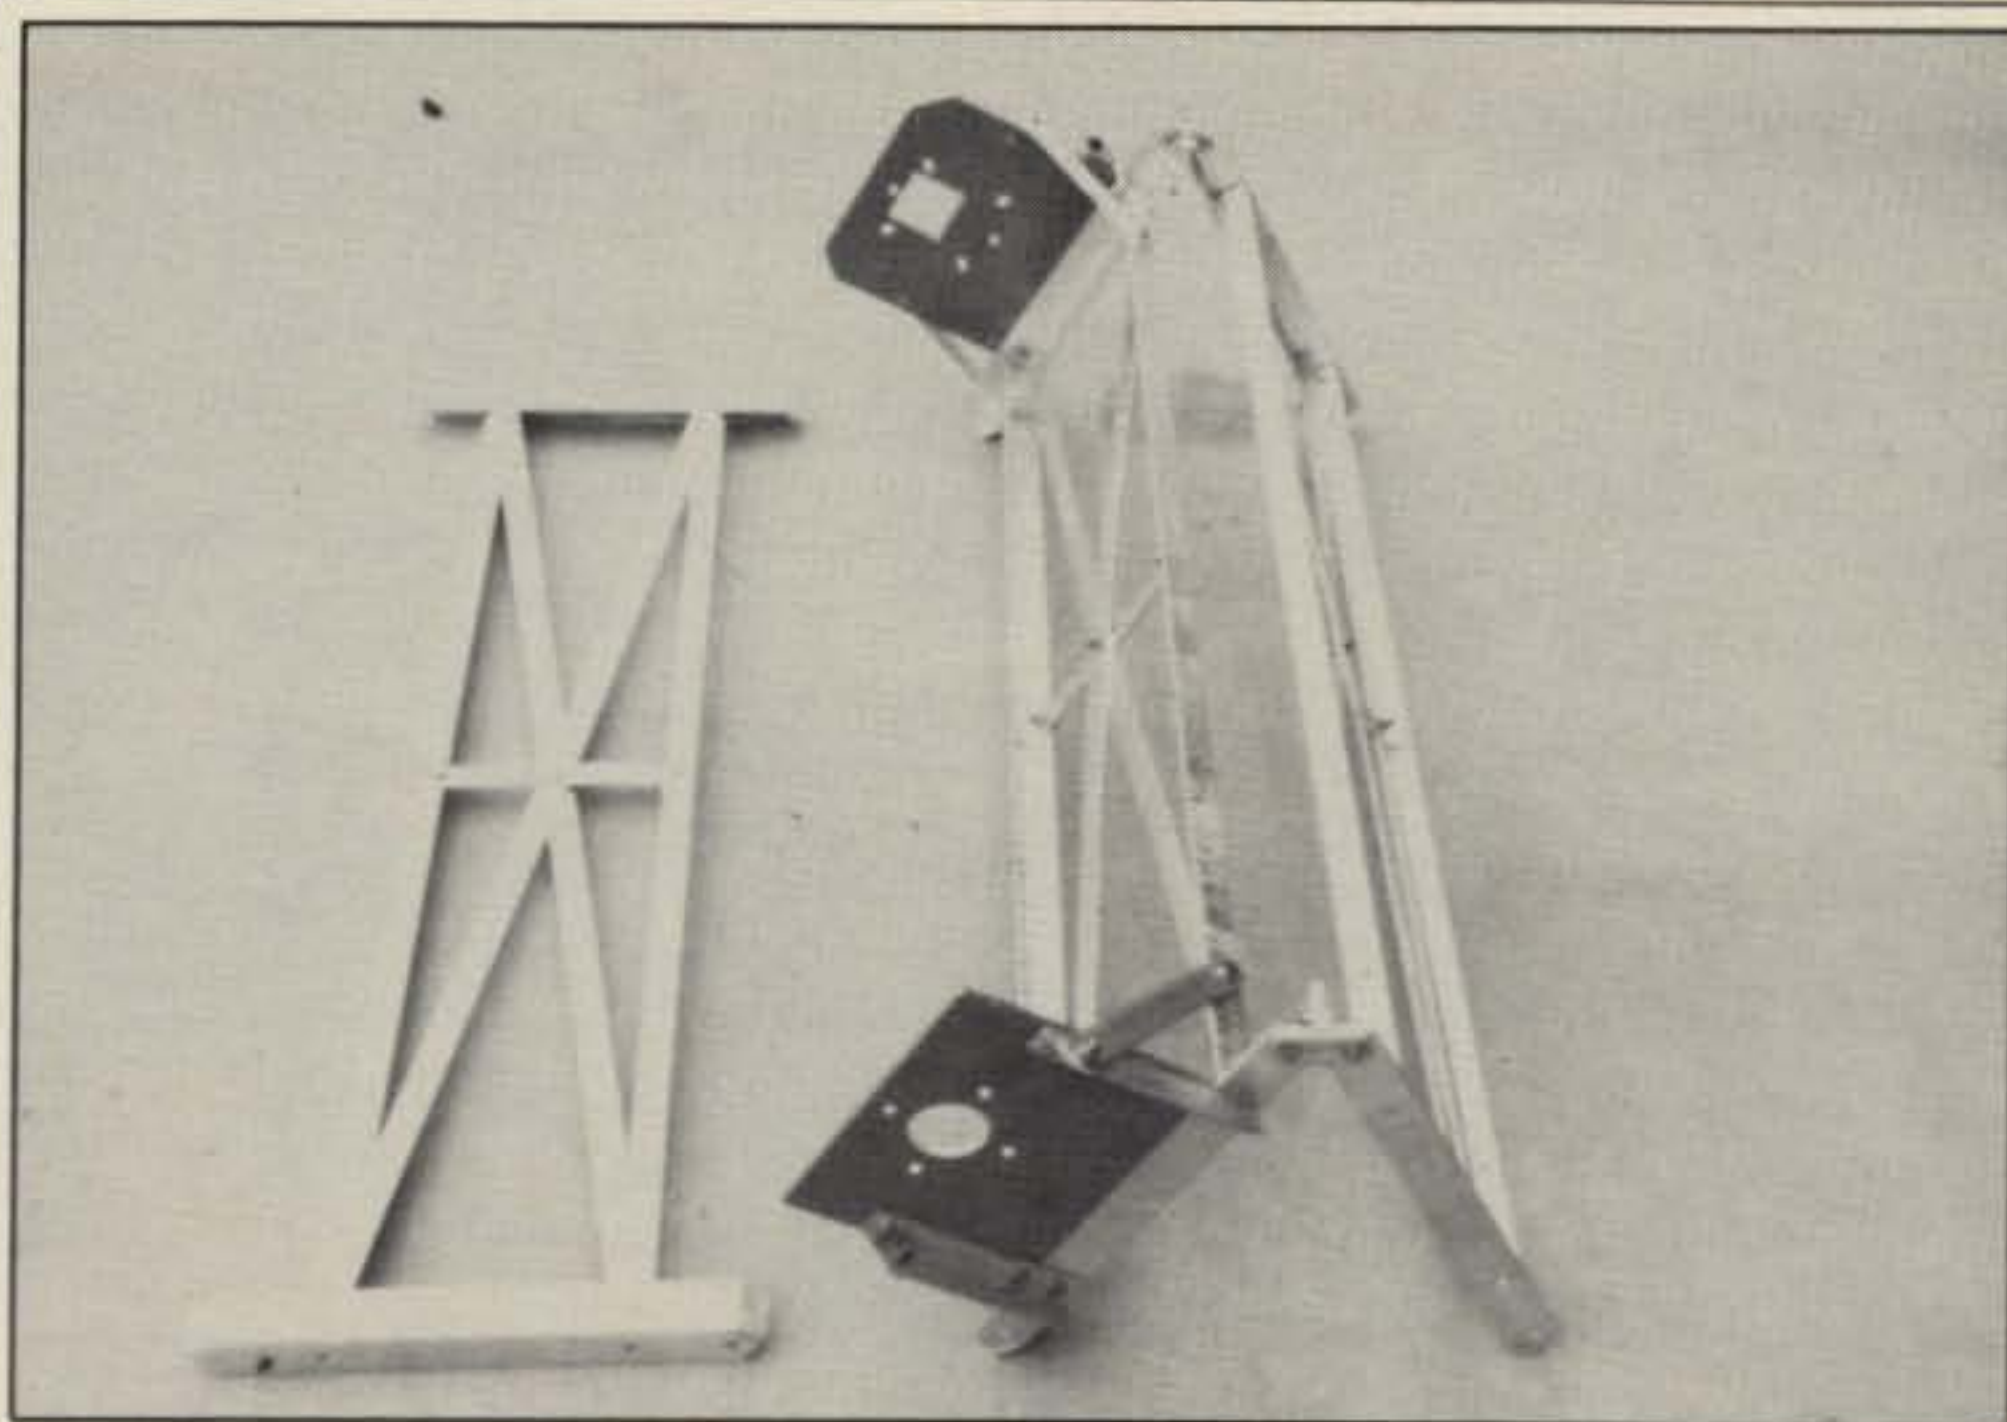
Photo C. After the three sides were assembled, two of them were attached together and the rotor plate and thrust-bearing plate were mounted.
